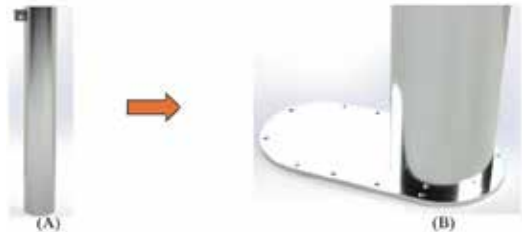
(A) Welding of pulley housing 1, tube 1 and (B) the main body
